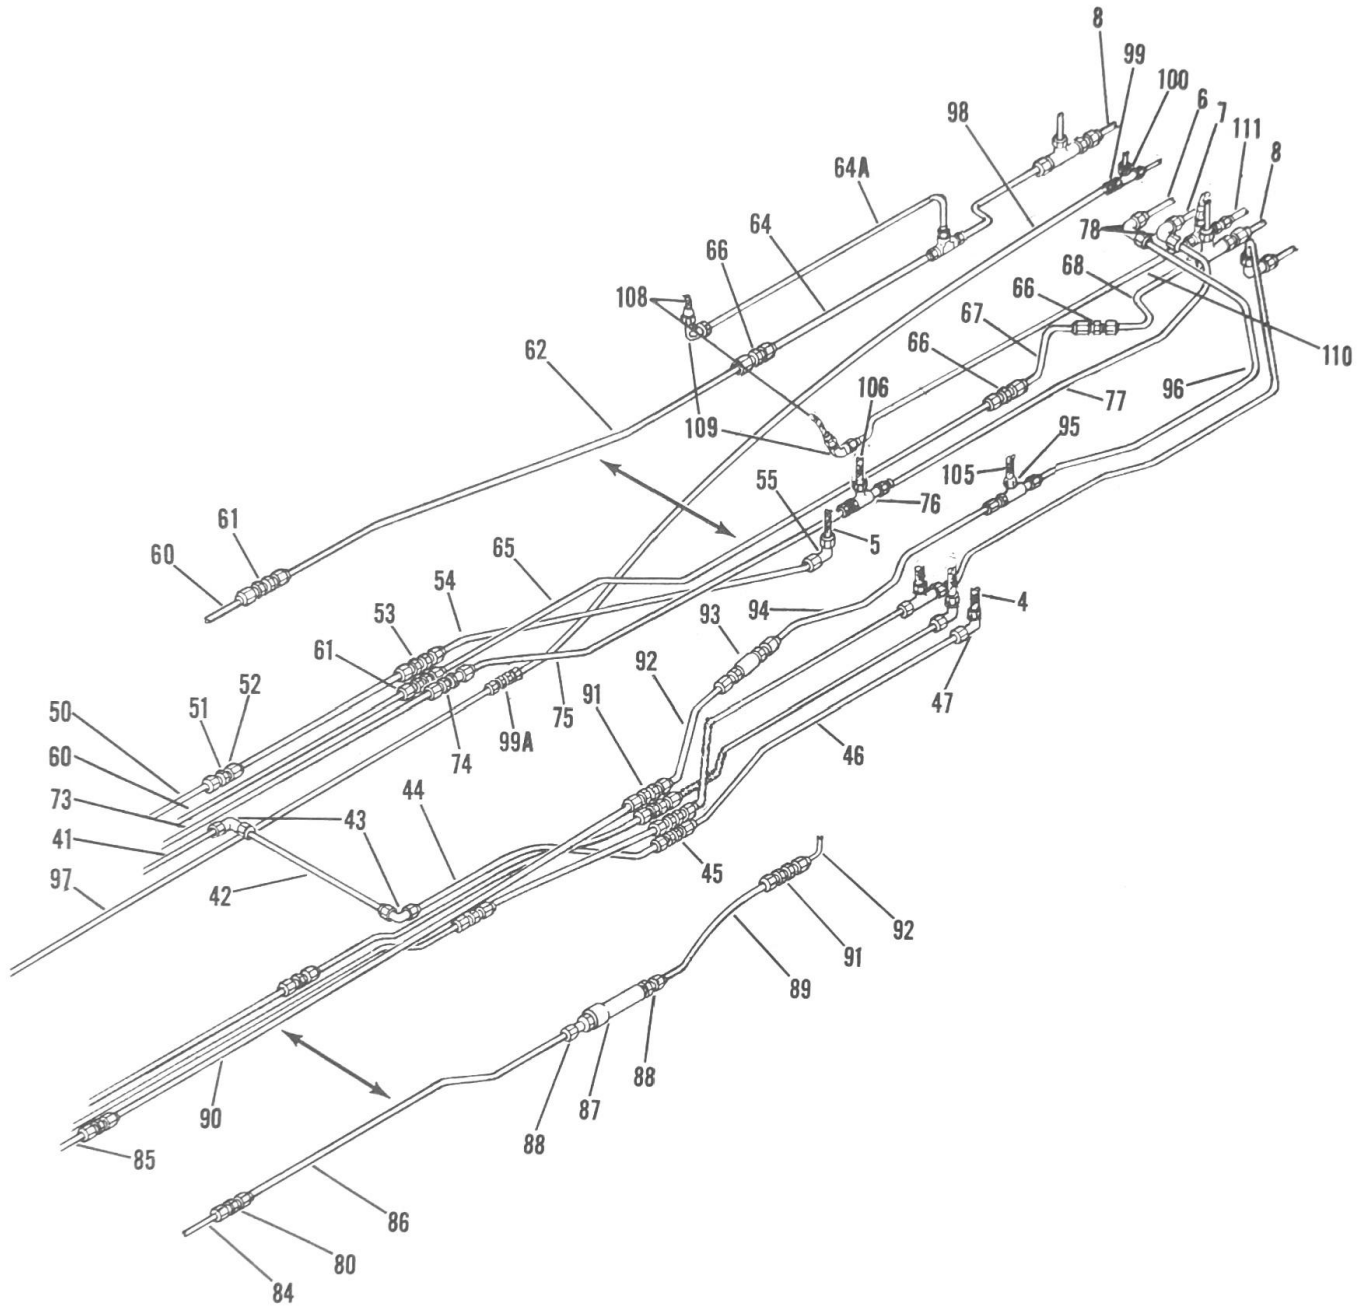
Hydraulic System Installation (Sheet 1 of 2)
